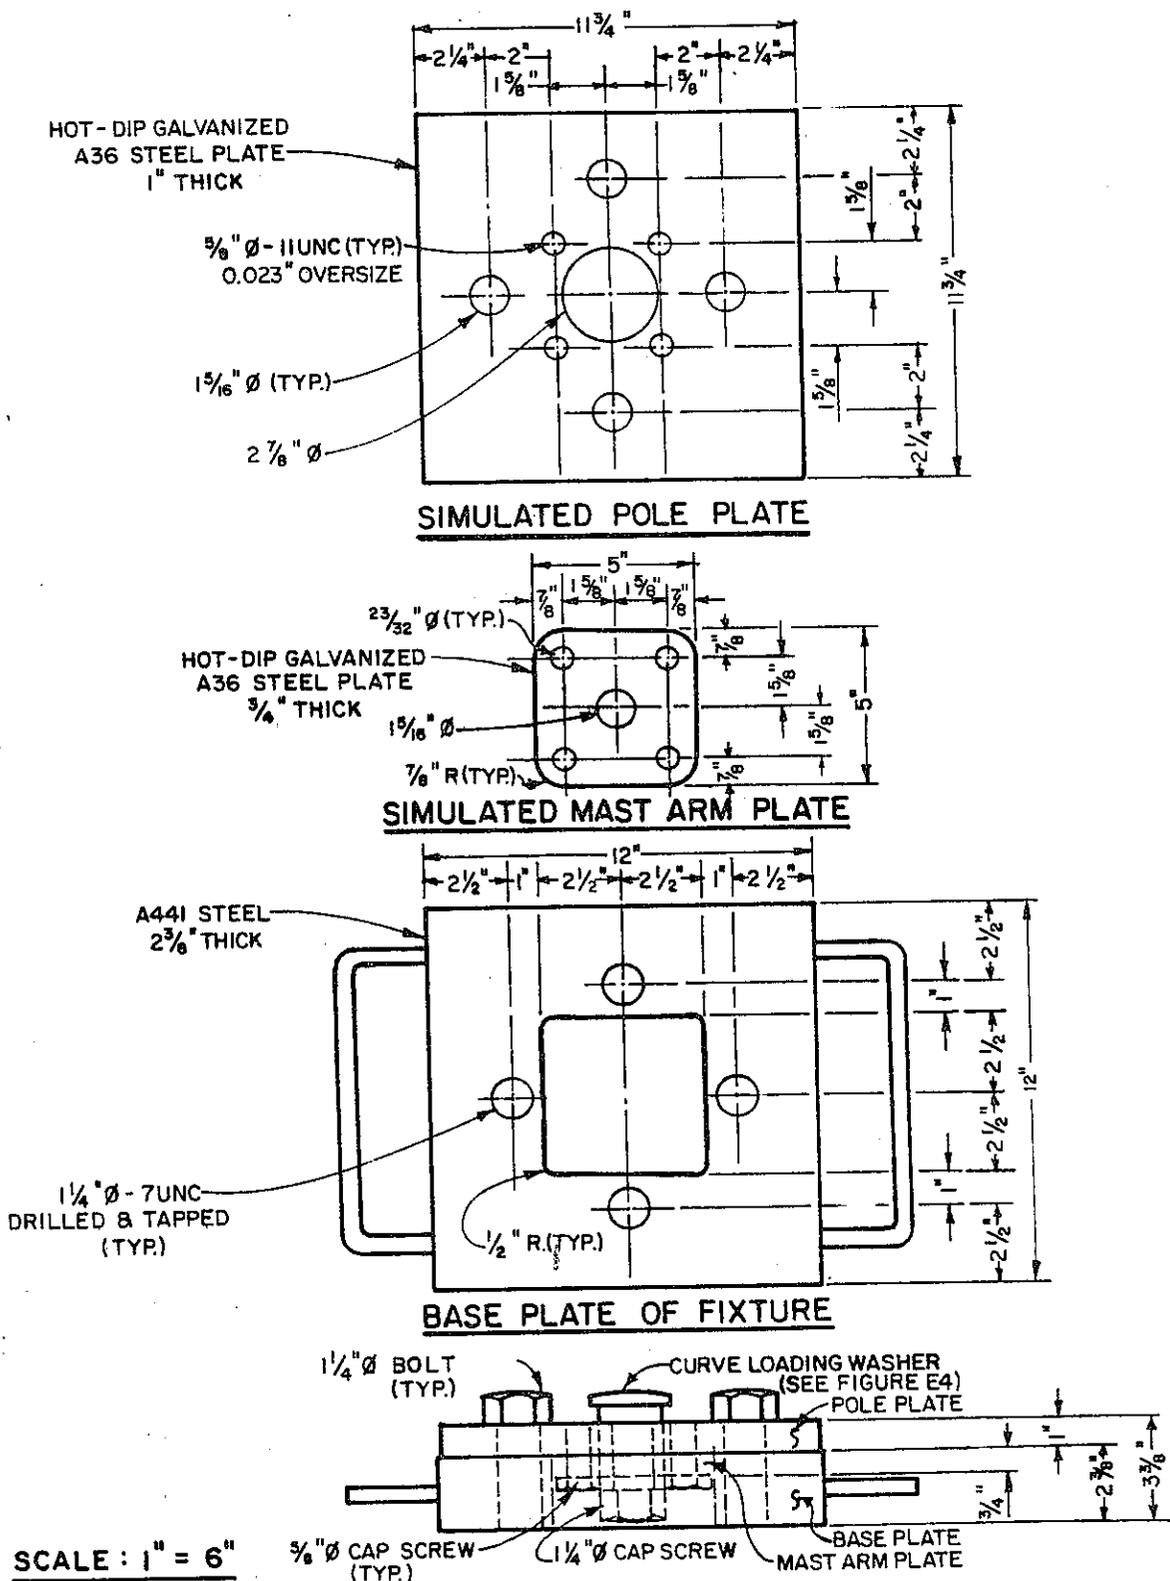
Test fixture for $\frac{5}{8}$ " \varnothing x $1\frac{3}{4}$ " ASTM A325 hot-dip galvanized cap screws.
